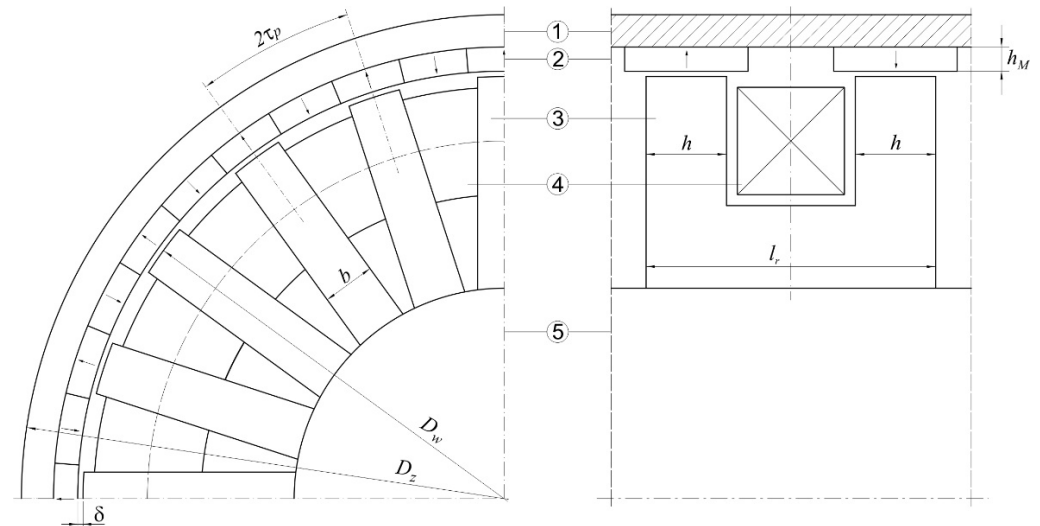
Cross-section and longitudinal section of the transverse flux machine (TFM) basic version: 1—outer steel cylinder, 2—permanent magnets, 3—armature components—U cores, 4—winding ring, 5—hub/shaft.
